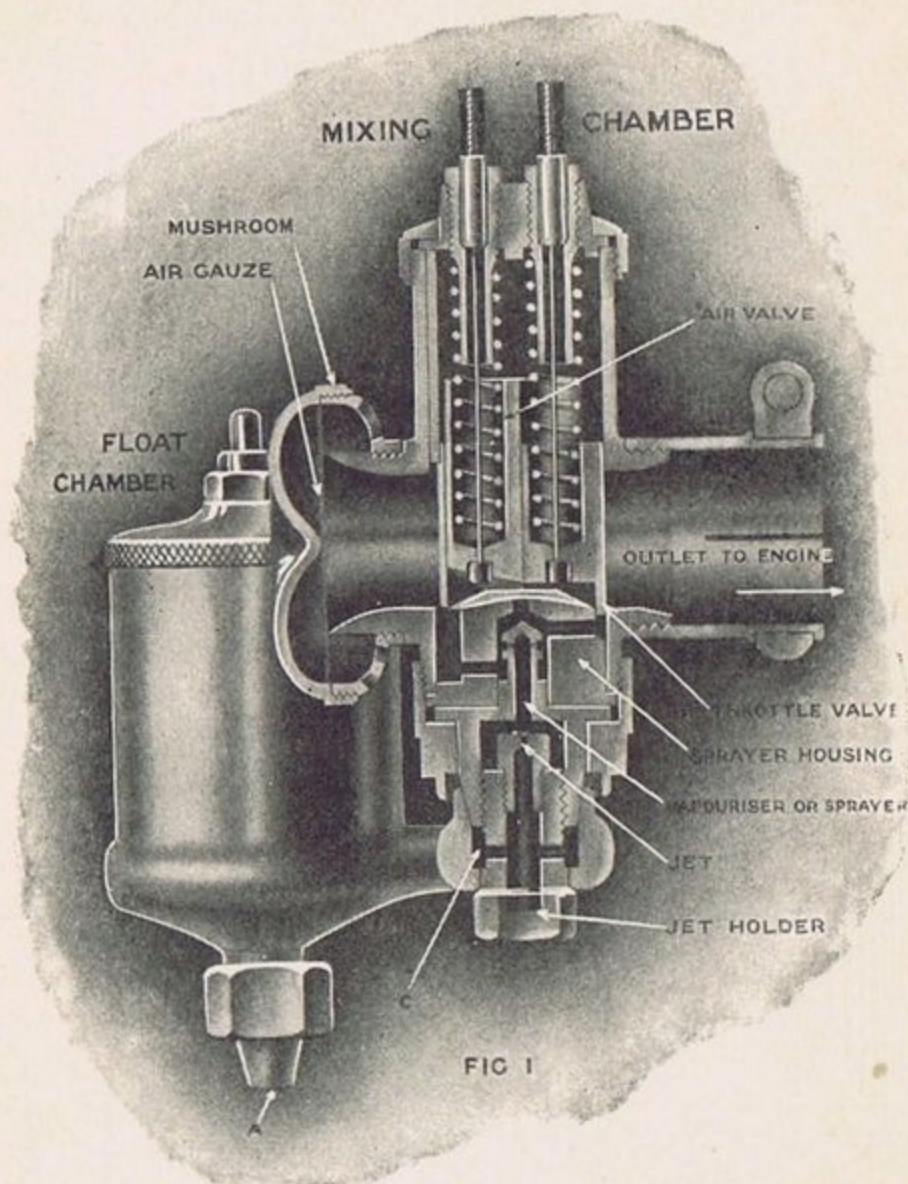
CUT-AWAY VIEW OF THE AMAC CARBURETTOR
